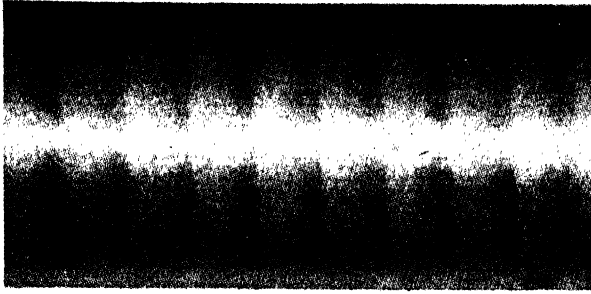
Surface traverse lines caused by faulty wheel dressing.
